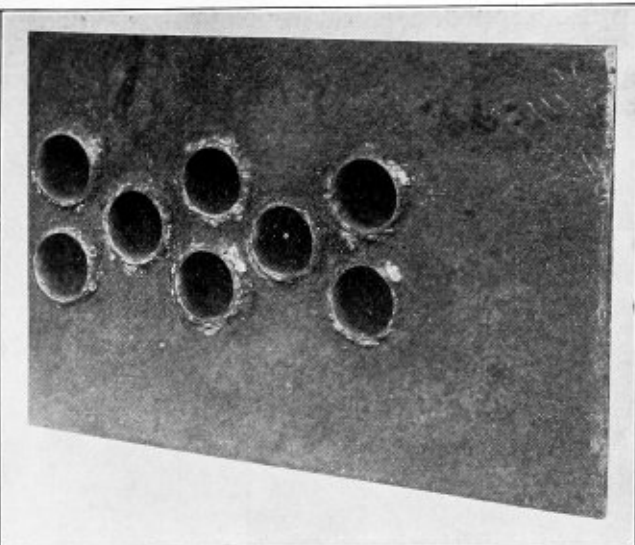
Small Section of Locomotive Flue Sheet, Tubes, Welded
